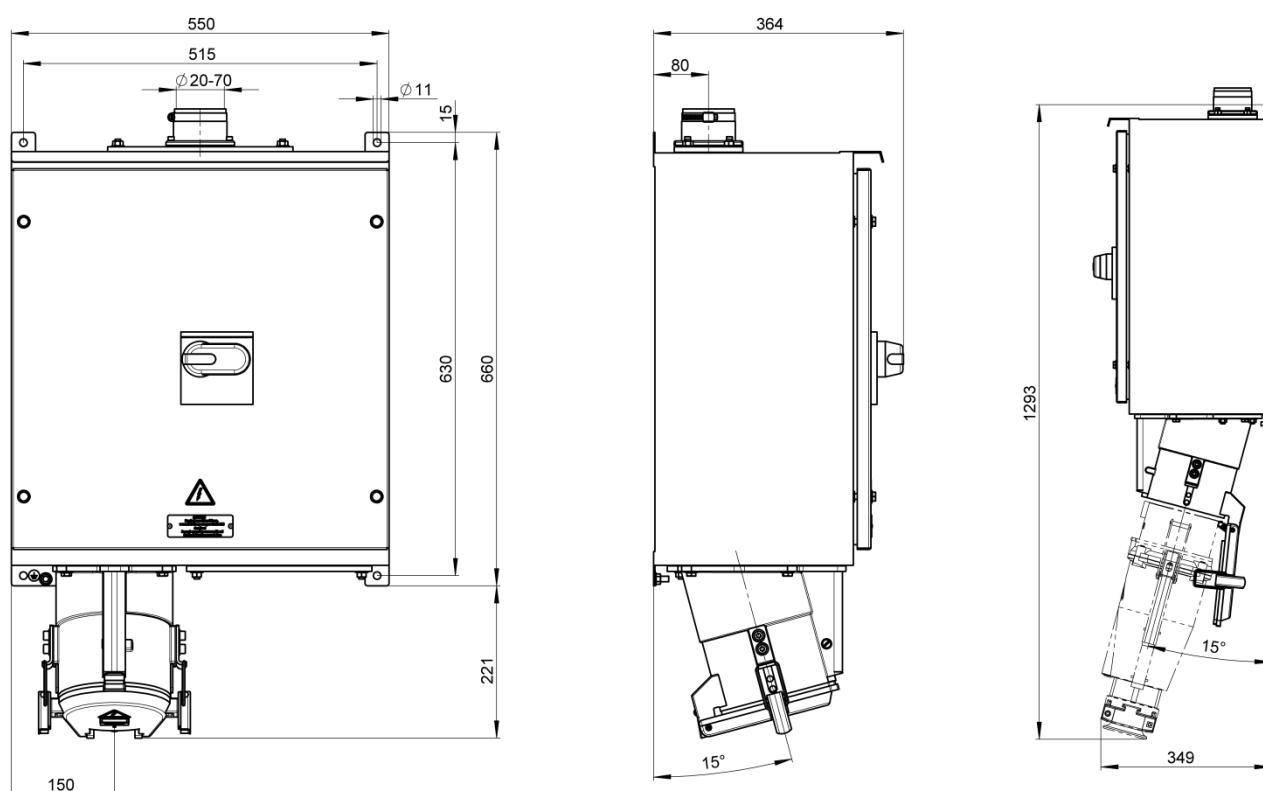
Dimensions, Connector Unit with Circuit Breaker CUCB B-Line (250 A – 400 A) in mm
